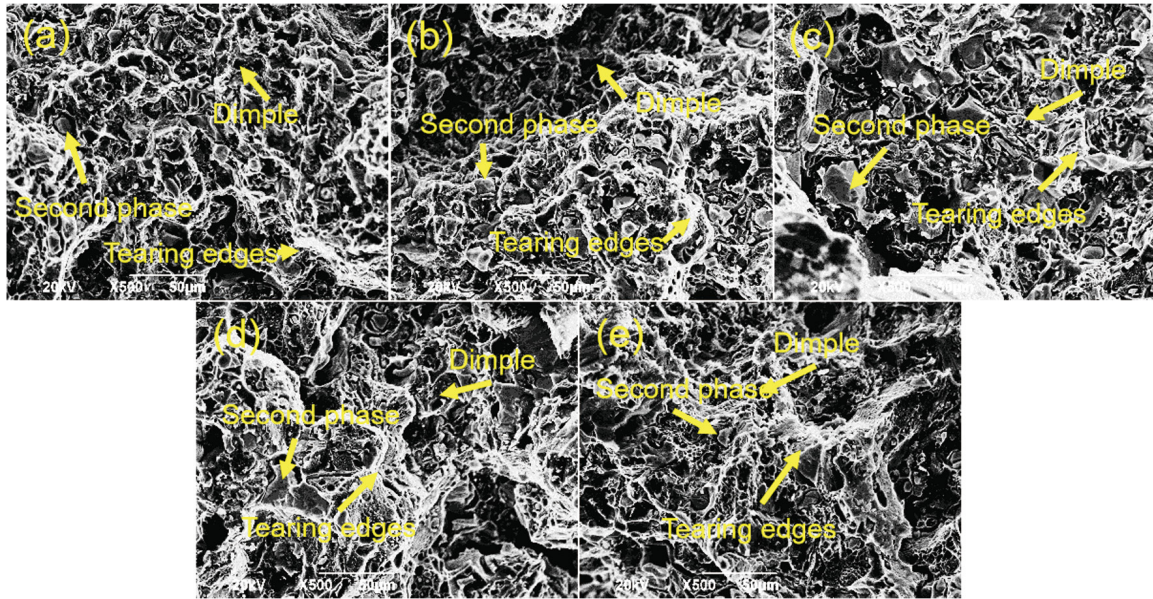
Fracture morphology of tensile specimens with different surfaces: (a) upper surface; (b) 1/4 surface; (c) 1/2 surface; (d) 3/4 surface; (e) lower surface
